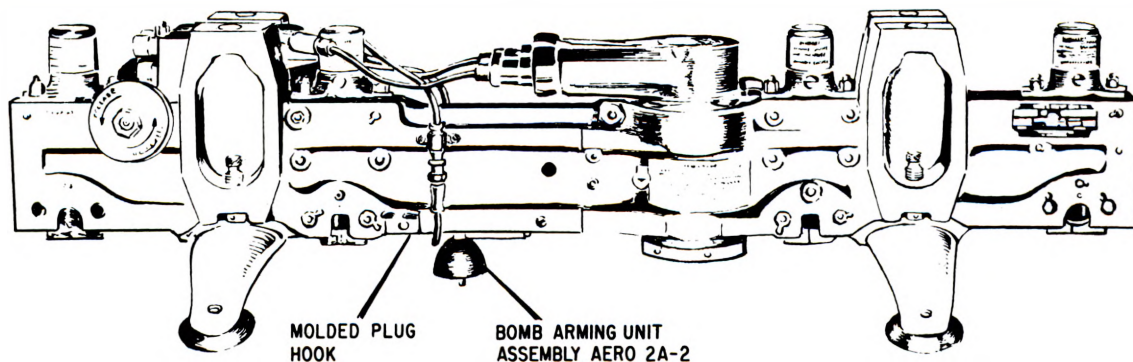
Aero 7A-1 ejector rack assembly.
